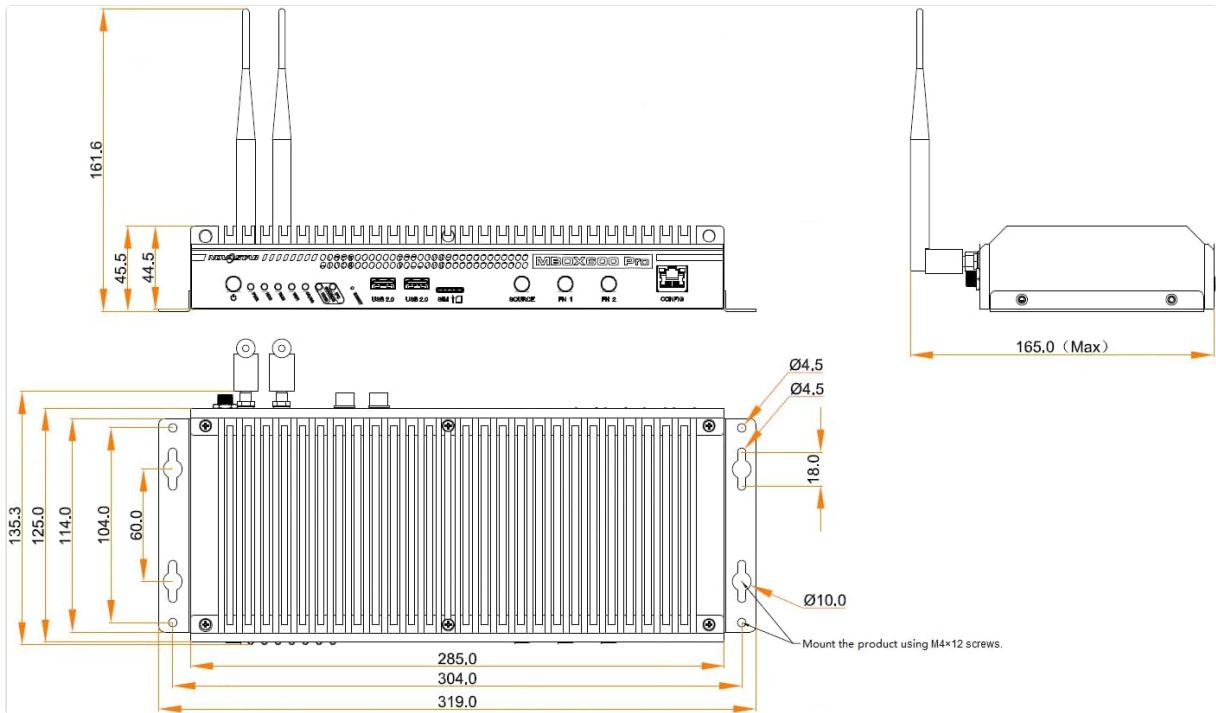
Dimensional drawing of the EnhanBili MBOX600 Pro LED Screen Controller, showing various measurements and mounting points. The diagram indicates mounting with M4x12 screws.
